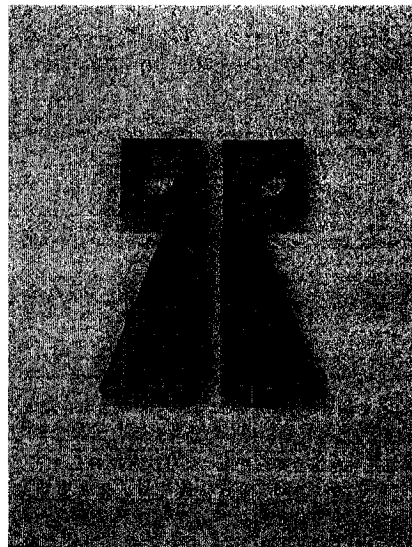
Schematic drawing of aluminium plate having notch shaped projection
